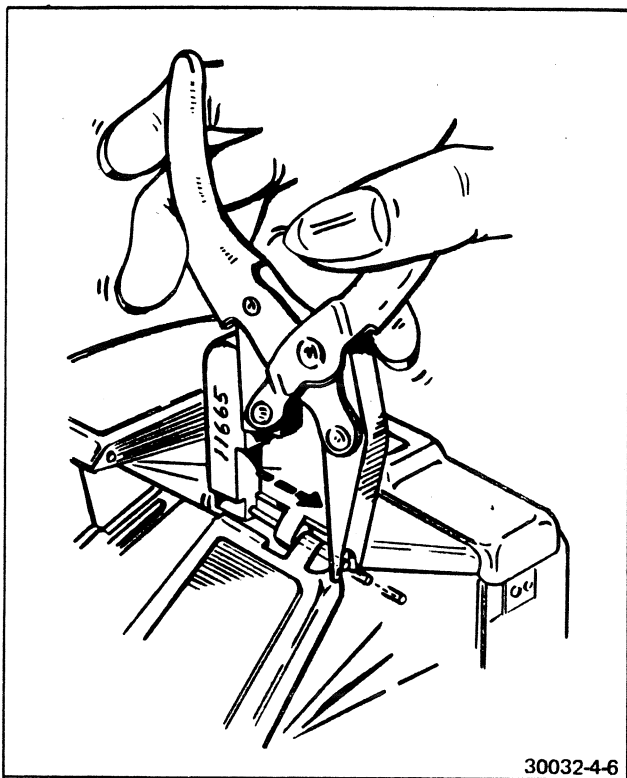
REMOVING SHORT-COVER-TO-MIRROR COVER HINGE PINS
